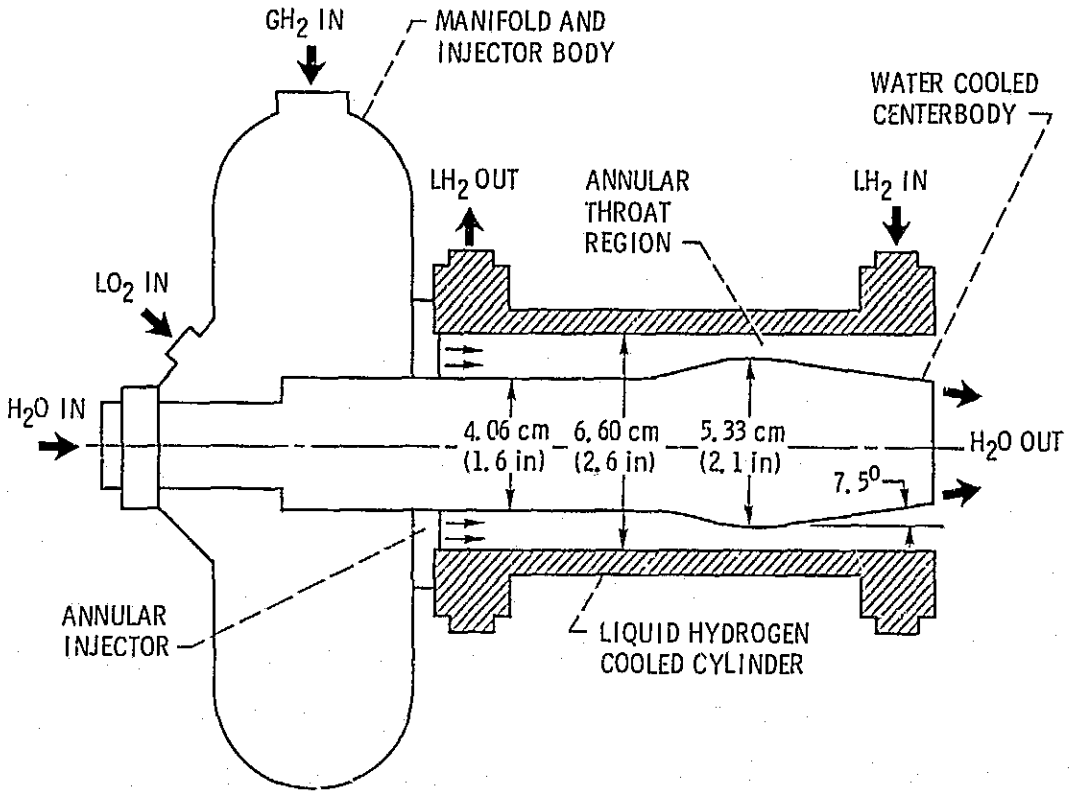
Schematic of cylindrical thrust chamber assembly.
